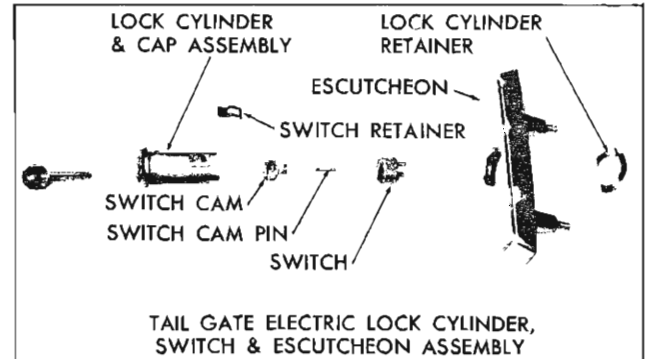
Tail Gate Electric Lock Cylinder, Switch and Escutcheon Assembly
